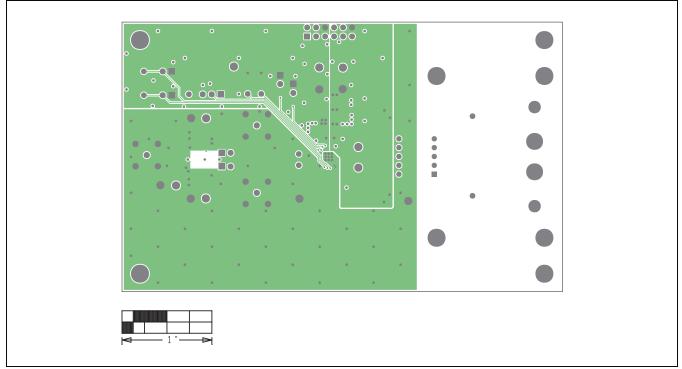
MAX44211 EV Kit PCB Layout—Inner Layer 3
